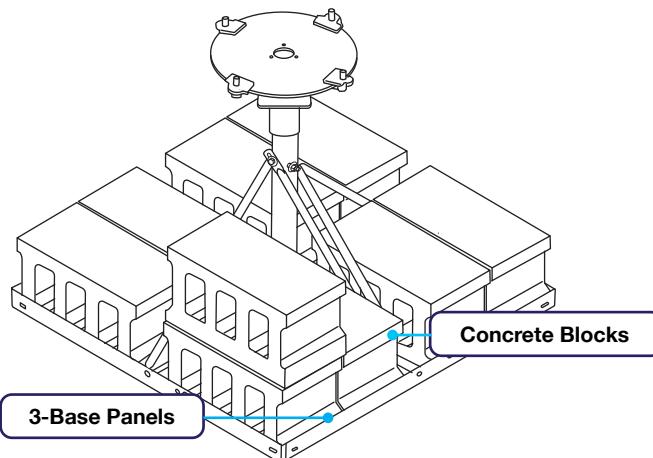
Placing Concrete Blocks on Base Panel of NPM
